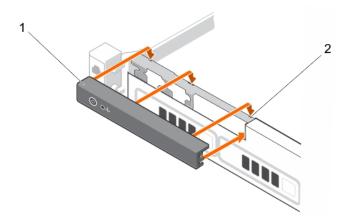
Installing the control panel—four 3.5-inch hard drive chassis
